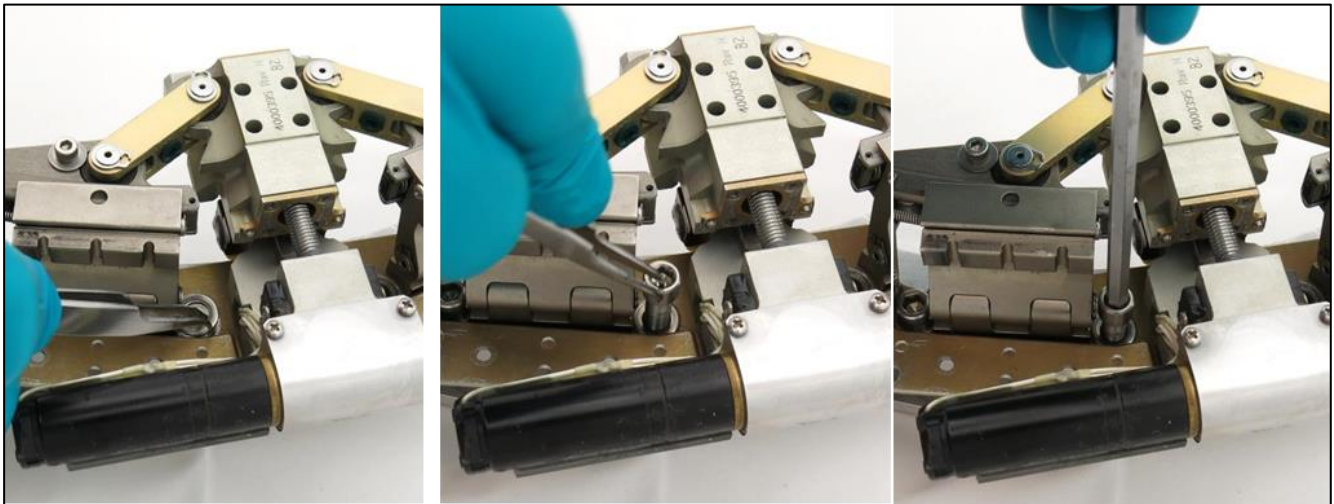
Carefully install fasteners immediately adjacent the MBA
